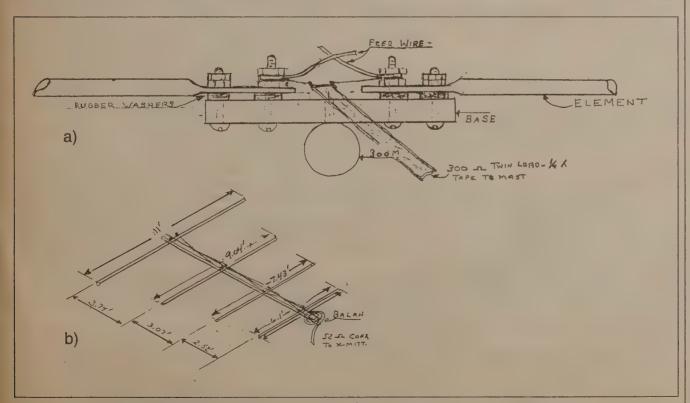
Detail of the element assembly: A) attaching the elements to the wood base; B) attaching the elements to the boom.
